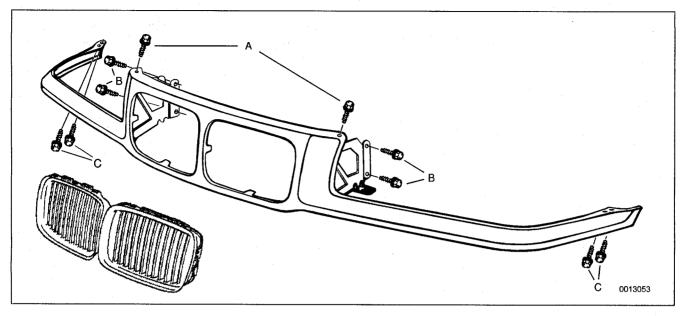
Front panel assembly. Note top retaining screws (A), retaining screws at radiator support (B), and side retaining screws (C).
